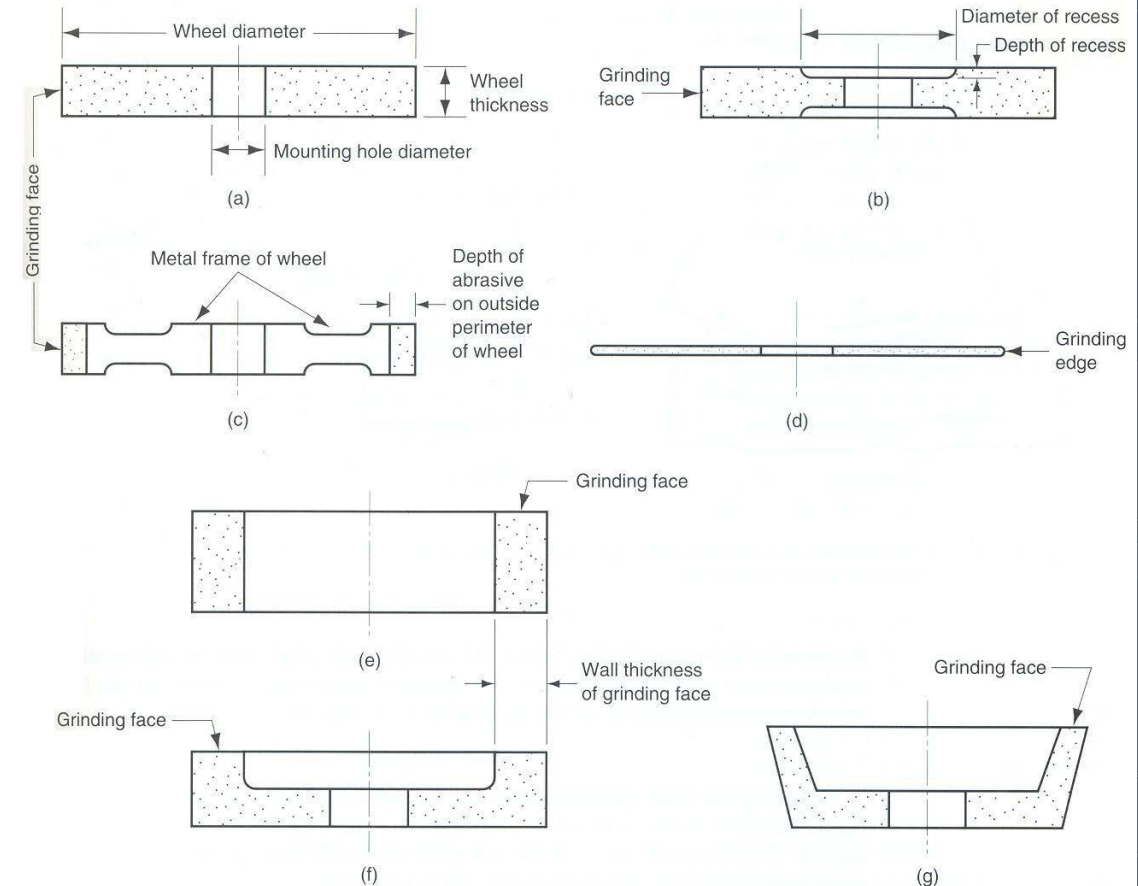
Some standard grinding wheel shapes: (a) straight, (b) recessed two sides, (c) metal wheel frame with abrasive bonded to outside circumference, (d) abrasive cutoff wheel, (e) cylinder wheel, (f) straight cup wheel, and (g) flaring cup wheel
